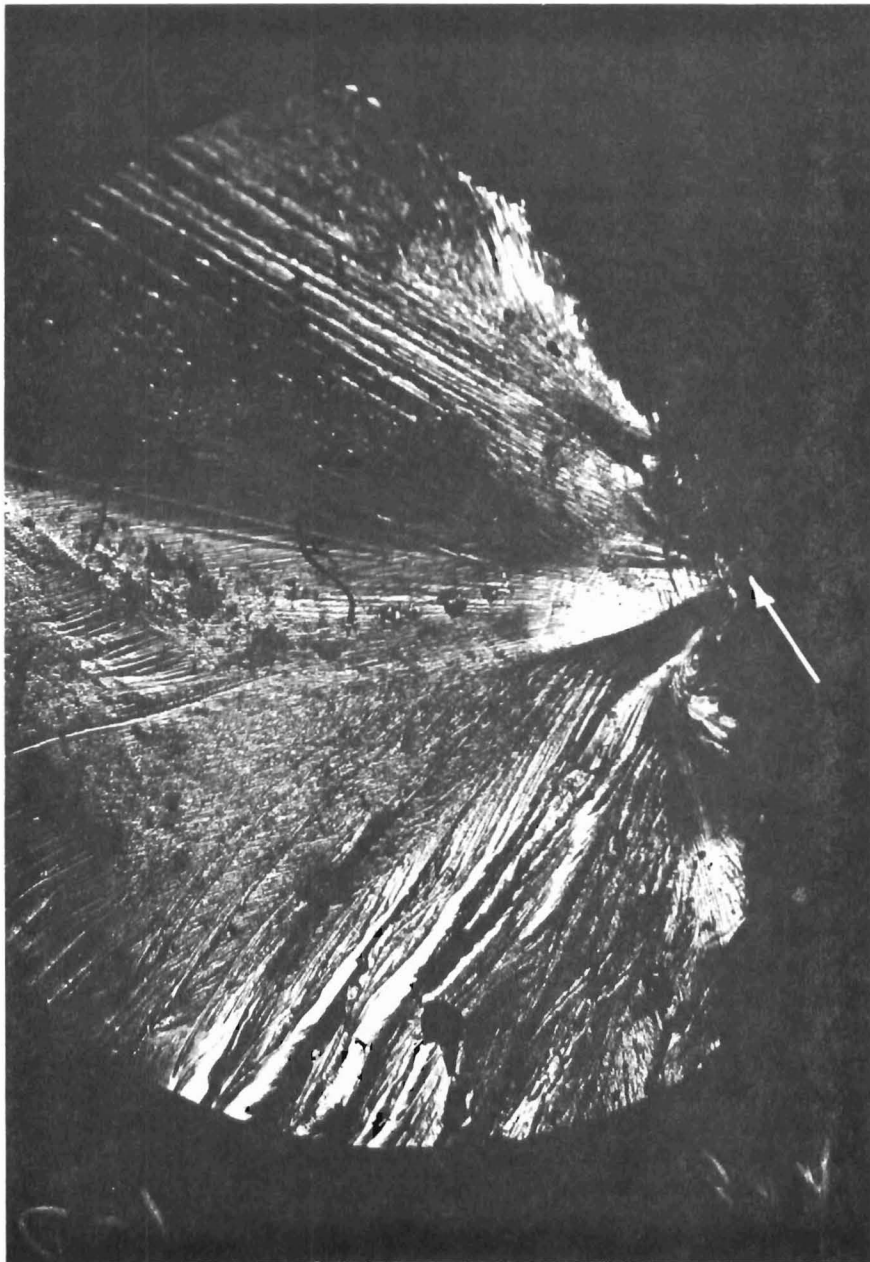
Fracture Surface of a Tungsten Specimen
